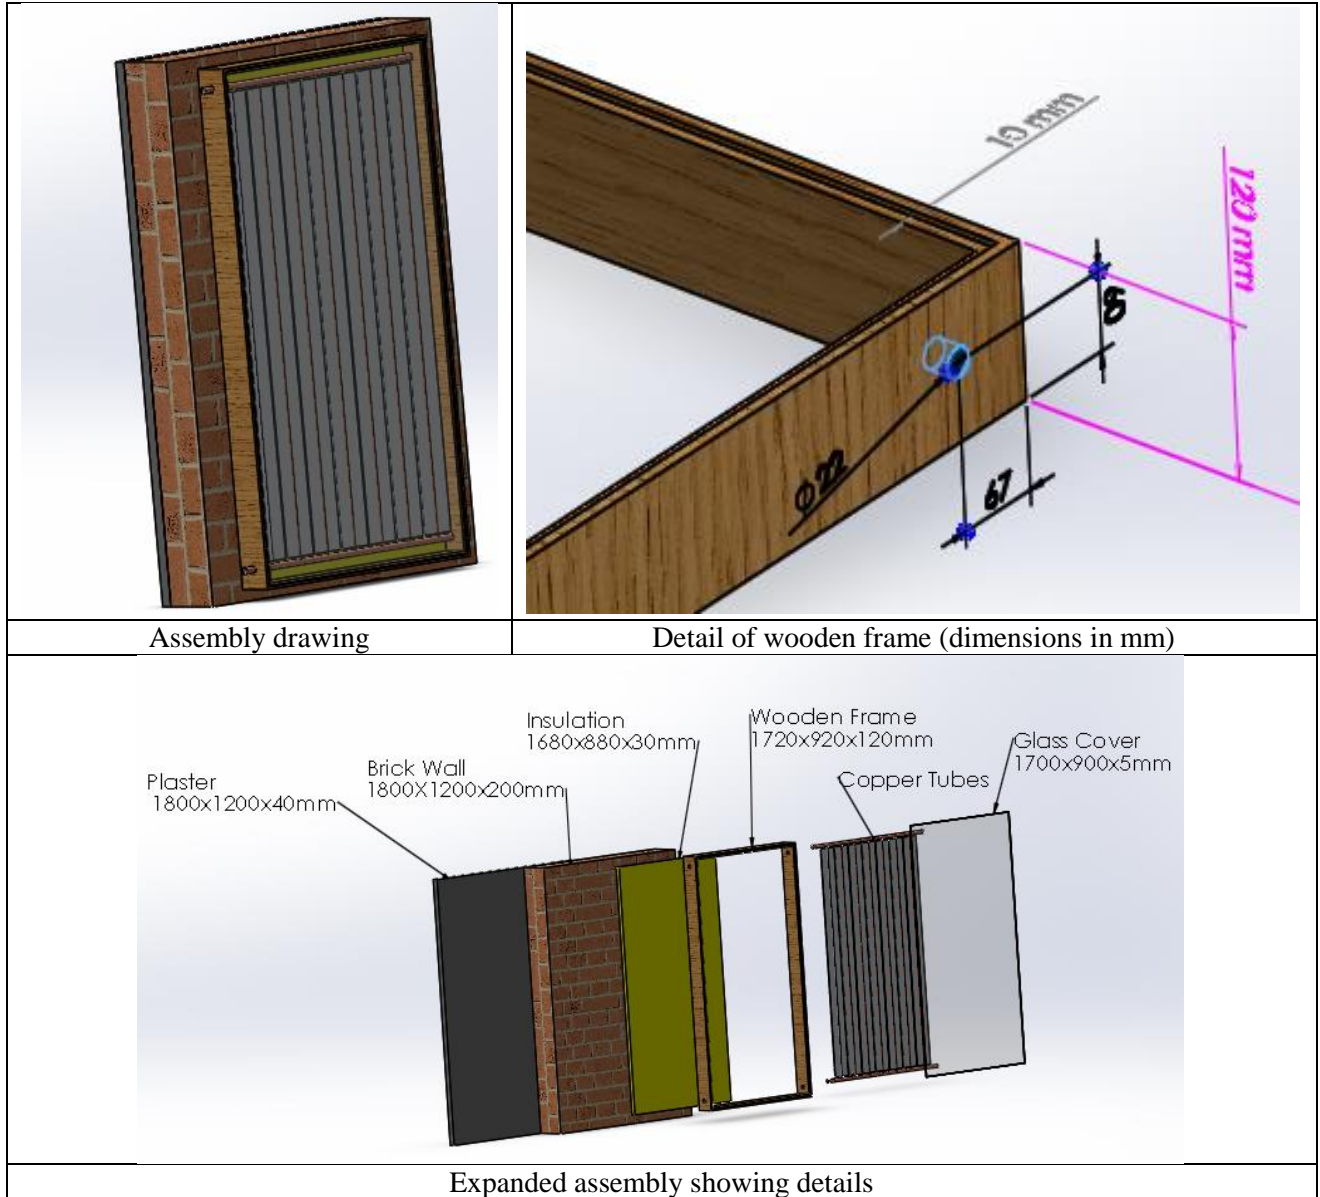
Engineering drawings of the Modular Intergraded Solar/Thermal Flat plate collector
